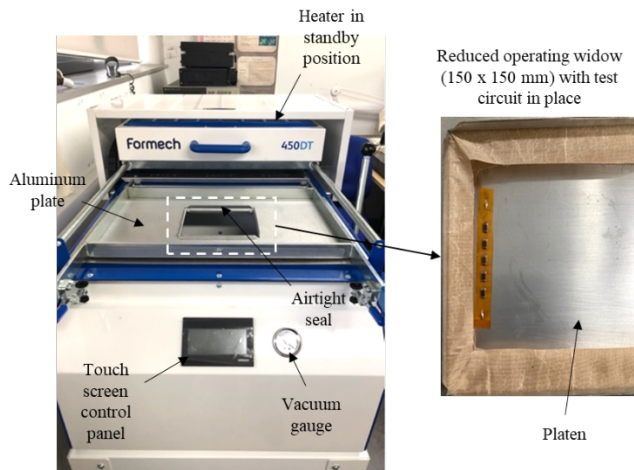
Front view of Formech 450DT and reduced processing window is shown with flexible electronic test circuit with series resistors.
